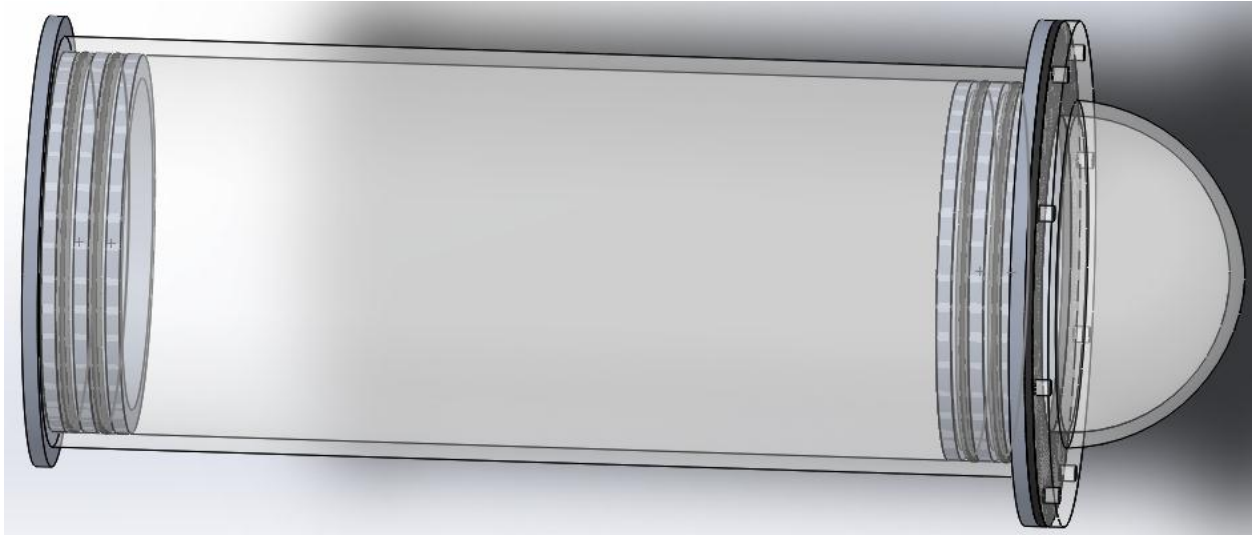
screenshot of only O-rings, gasket, front and rear aluminum tube enclosures.
